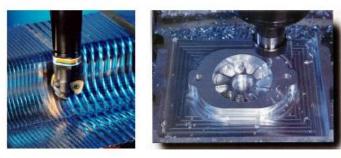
Close-up view of a hemispherical ball-end mill with indexed carbide inserts used for rough cutting of a three-dimensional surface.
